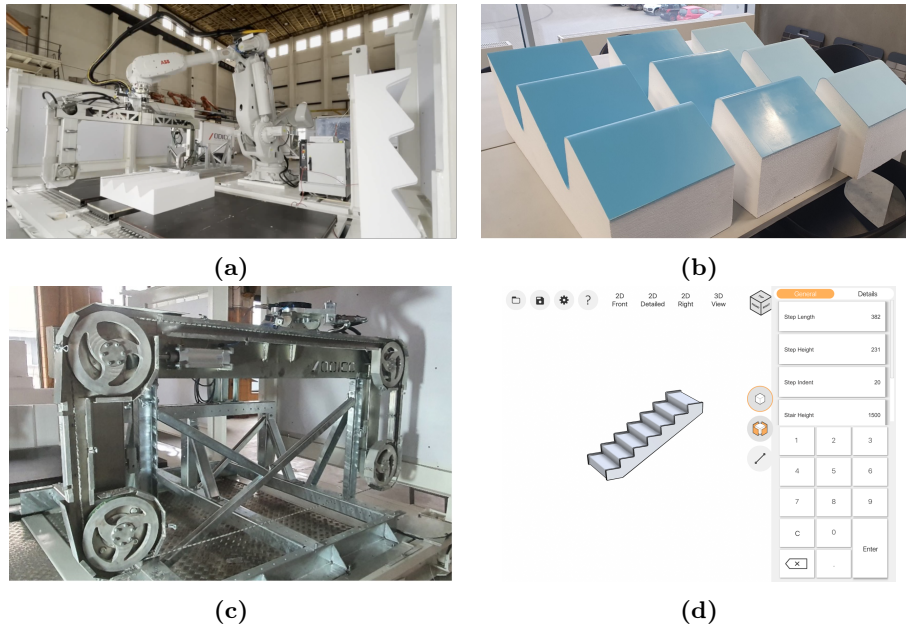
(a) Factory on the Fly™ unit; (b) samples of surface coated EPS moulds for staircase; (c) hydraulically driven abrasive wire-cutting end-effector and (d) auto generated tablet interface.
